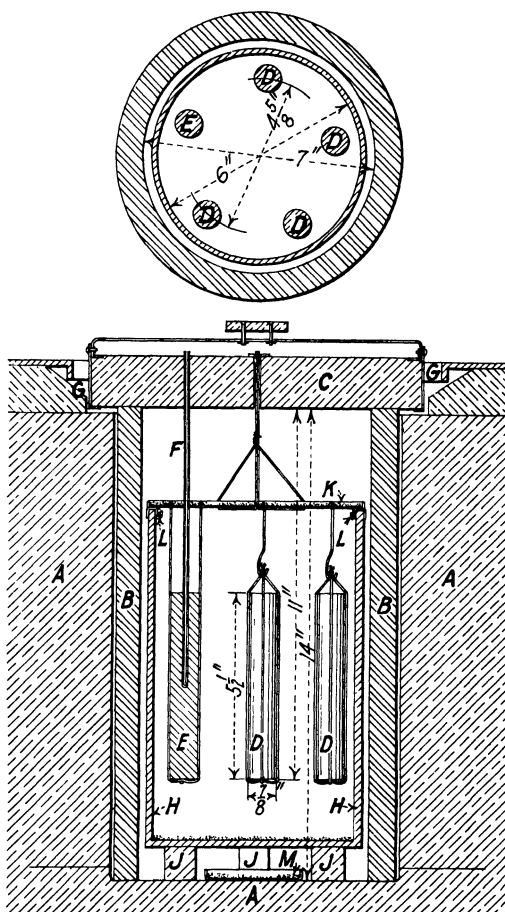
FURNACE SHOWING ARRANGEMENT OF SPECIMENS, MUFFLE, ETC., IN HEATING CHAMBER.
